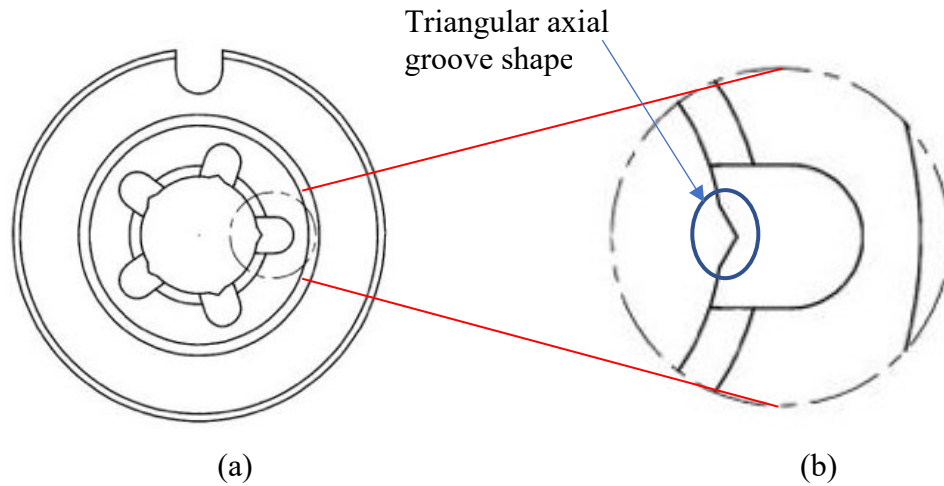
Journal bearing front view: (a) bearing; (b) original triangular axial groove detail
